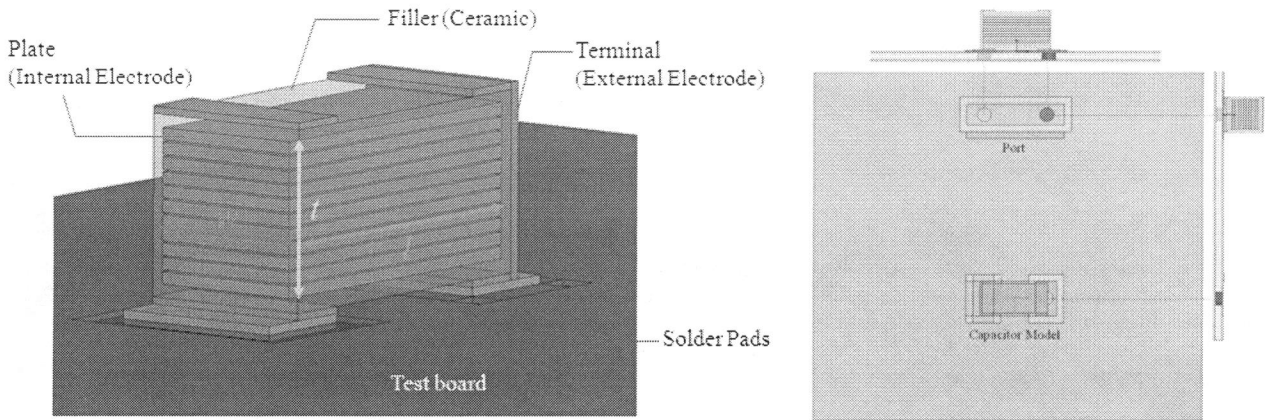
Left: 3D MLCC model. Right: Top and side view of a 3D model for the mounting fixture.
